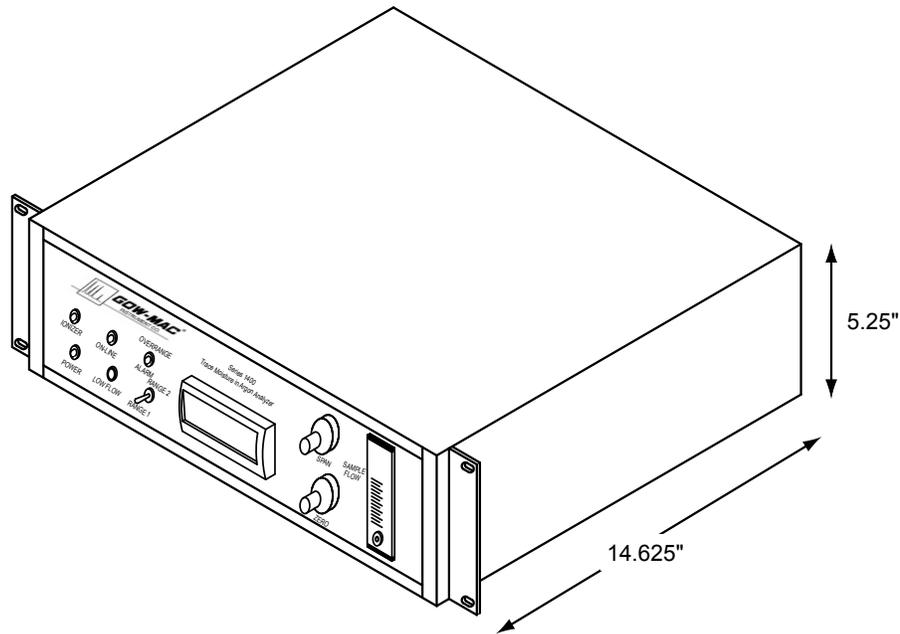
Series 1400 Analyzer Dimensional Drawing
